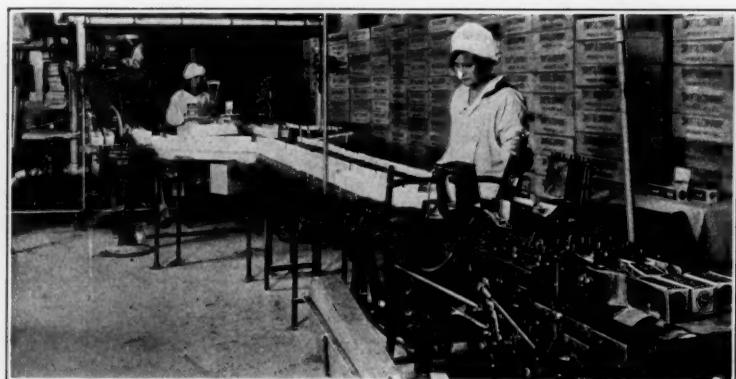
One-pound lard carton, duplex closing machine (in foreground), two filling machines, and two forming and lining machines
